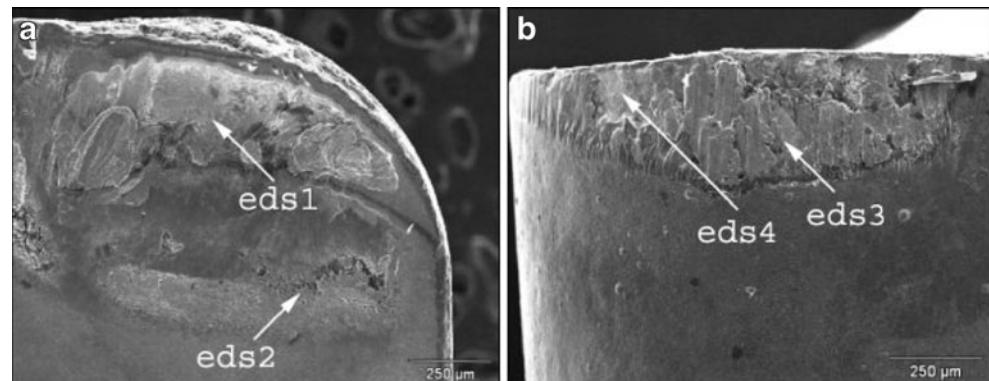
Tool rake and flank faces: $v_c=490$ m/min and conventional cooling
